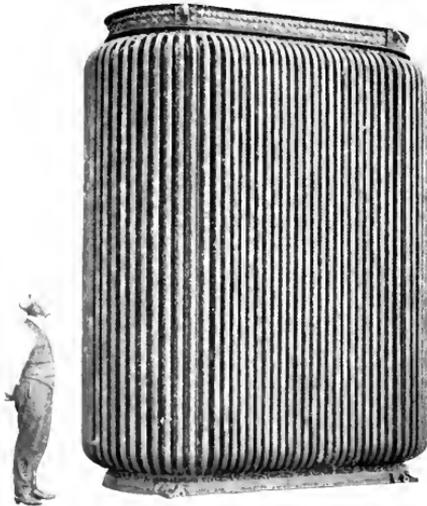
Finished Tubular Tank with Base, Seams, and Tubes Welded
